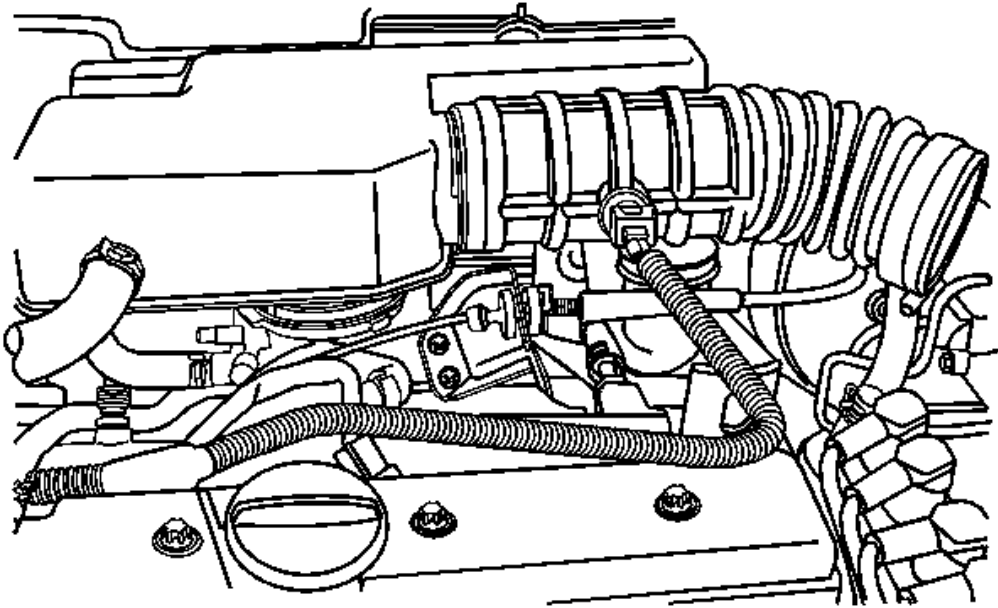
View Of Manifold Air Temperature Sensor And Throttle Body Intake Tube
